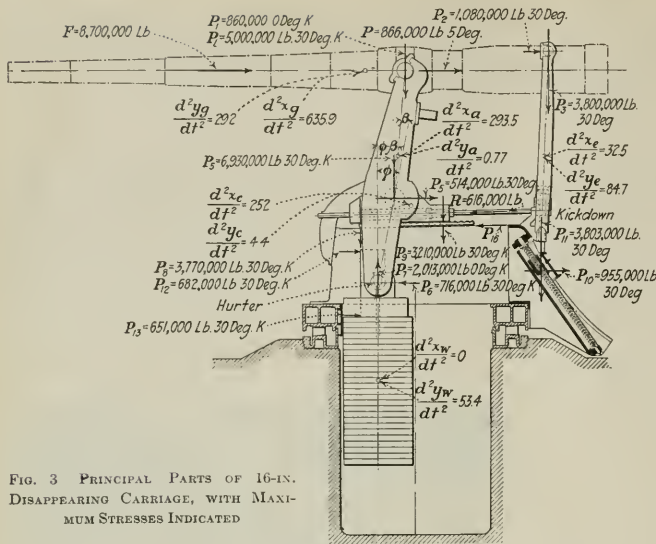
PRINCIPAL PARTS OF 16-IN. DISAPPEARING CARRIAGE, WITH MAXIMUM STRESSES INDICATED
